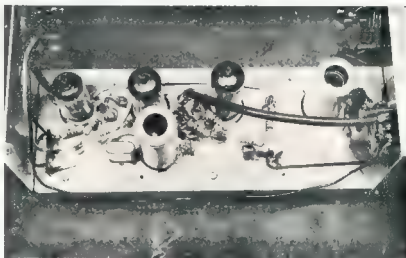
DETAIL "A" SHOWING METHOD OF MOUNTING GRID RESISTORS FOR V2 & V4
